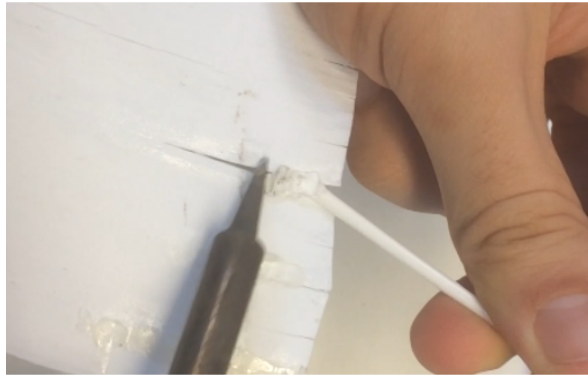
Repairing a large crack with a soldering machine(4)
